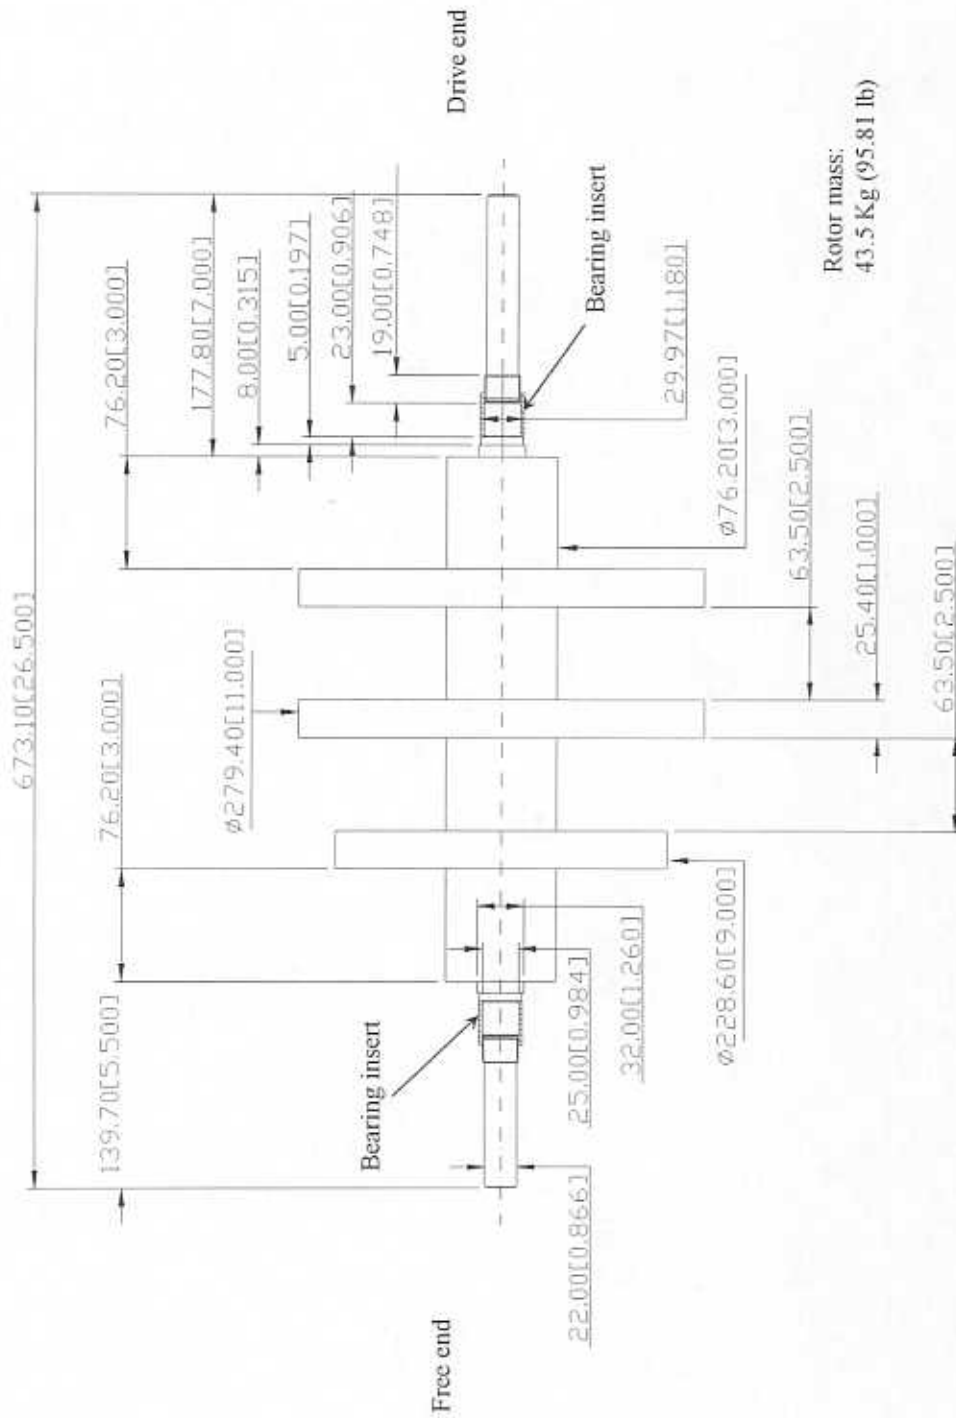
Test rotor main dimensions with hardened bearing races (steel inserts).
